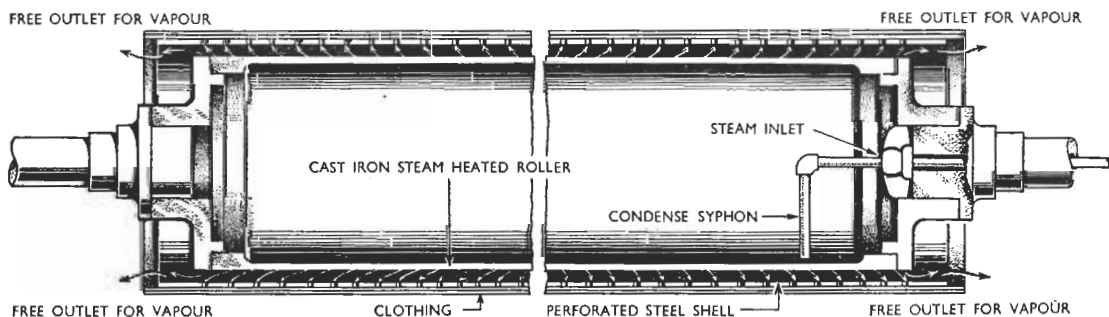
Full section of ventilated roller for 90 x 24-in flatwork ironer.
